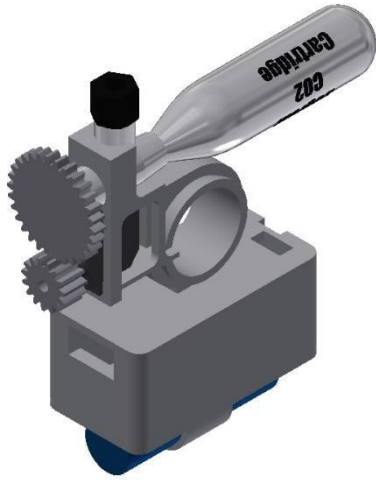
Prototype 4 Assembly by Jaco Jacobs 2022
